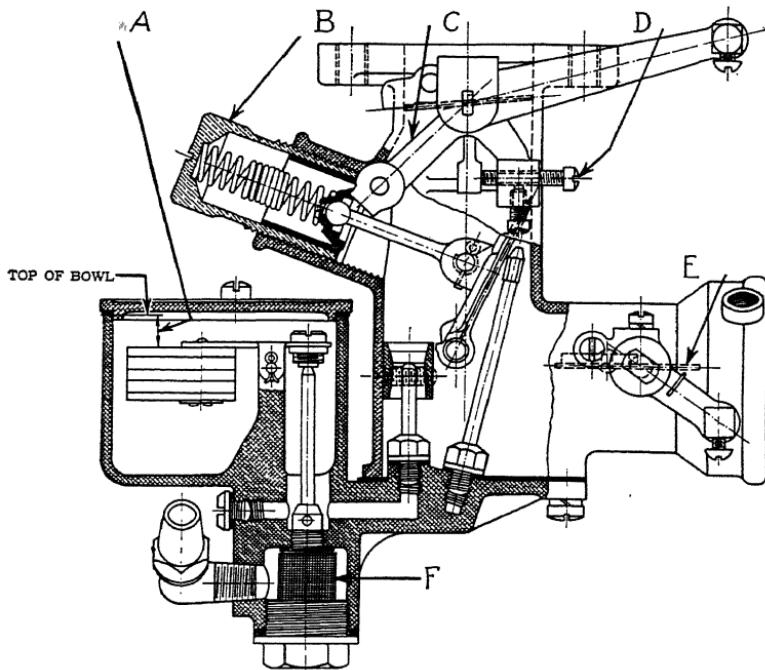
Service Drawing of Model "A" Marvel Carburetor
